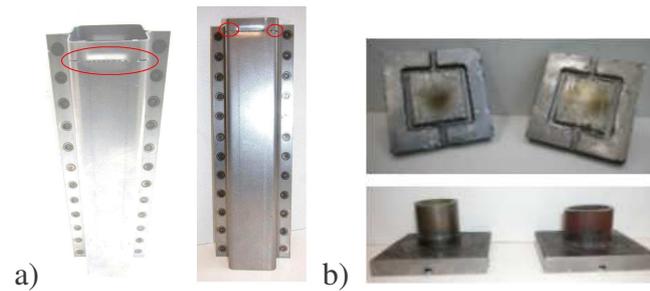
Test specimens: a) beam with cut corners and overpress, b) cramps.
